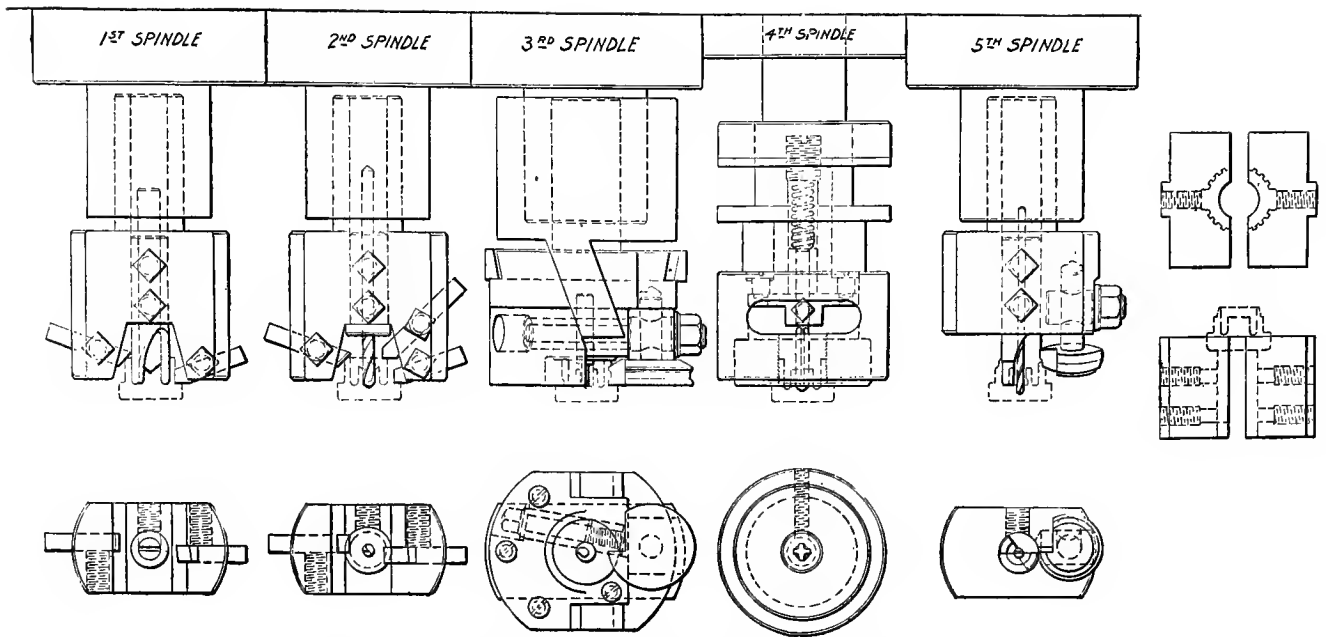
TOOLING FOR MACHINING PROJECTILE PRIMING PLUG
